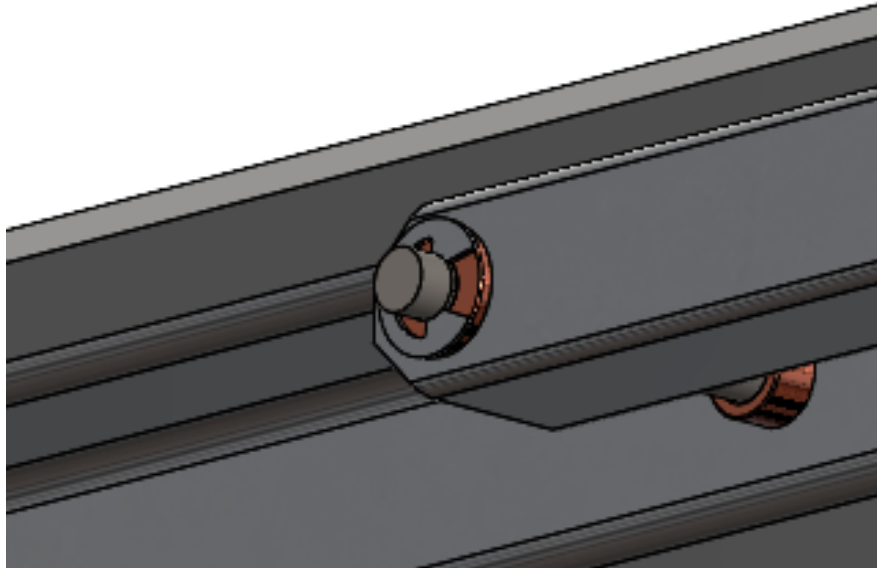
The 1/4" retaining ring assembled to the ramp shaft.
